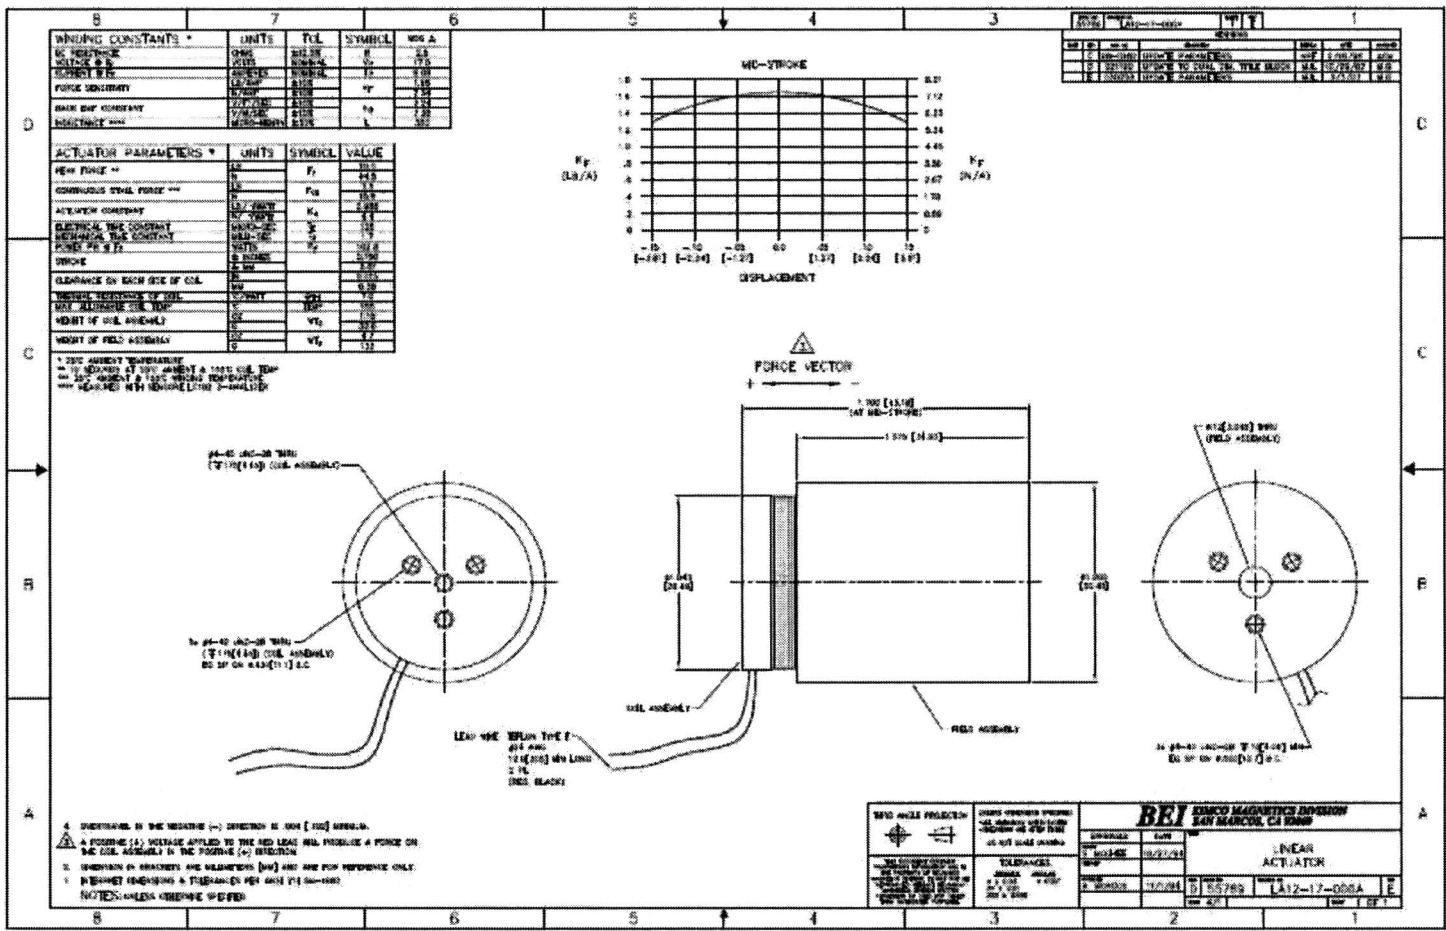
Drawing of the voice coil actuator Bei Kinco LA12
